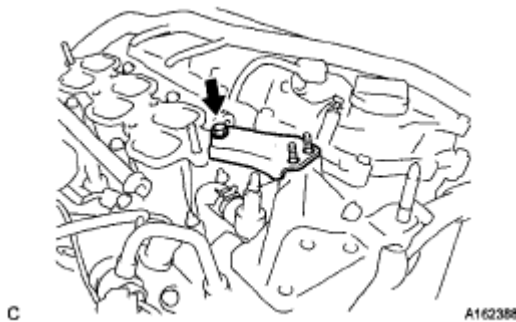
Removing Bolt And No. 2 Engine Mounting Stay RH
